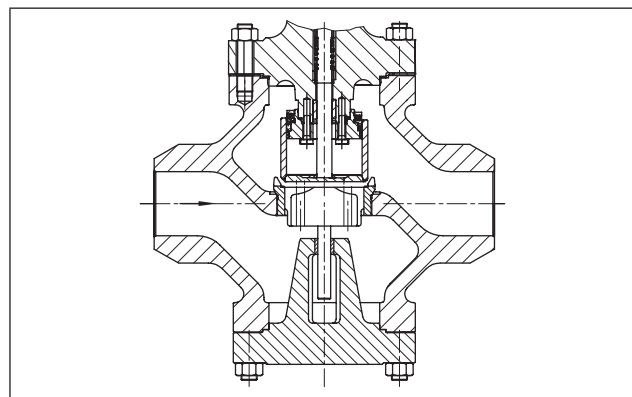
Type 3254 Valve with welding ends and balanced plug
